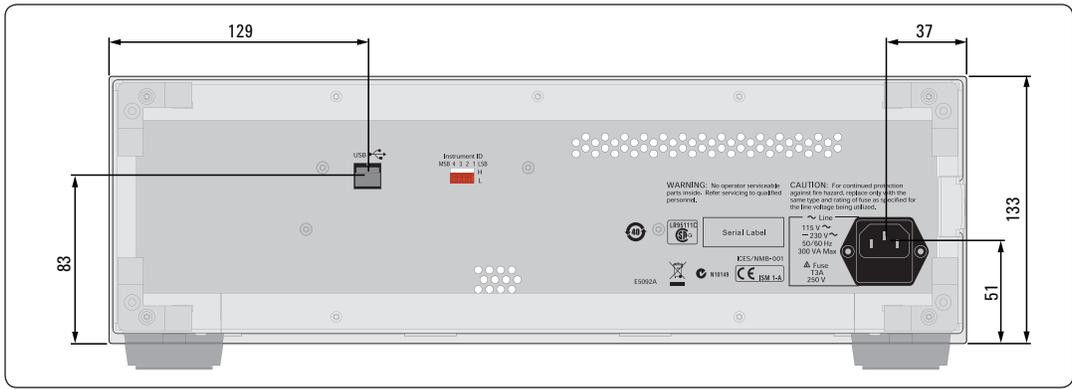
Dimensions (rear view, with Option E5092A-020, in millimeters, nominal)
